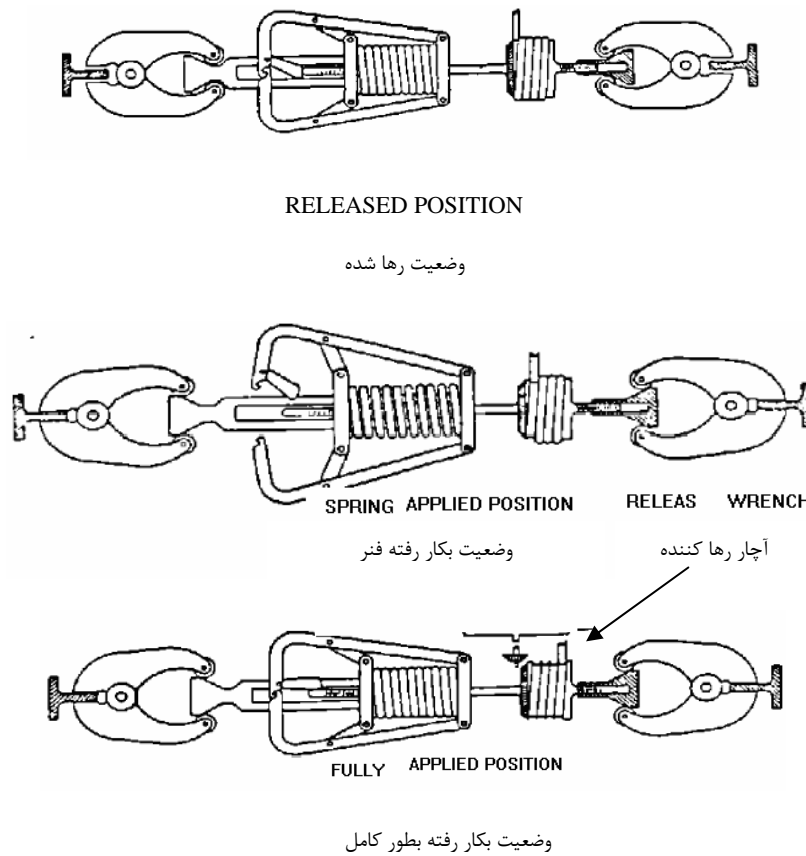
GRADUAL WEDGE CLAMP SPRING AND DRUM SAFETY (PRATT), FORM 1
